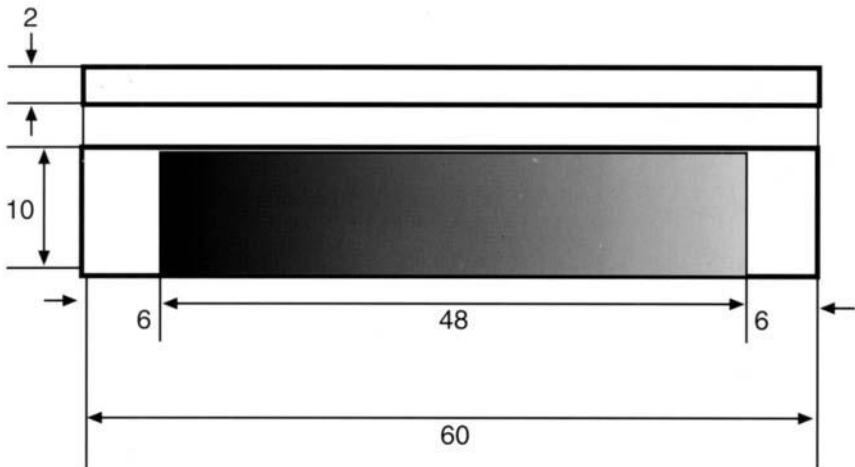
Dimensions of test specimen (www.iran-mavad.com - test surface).
